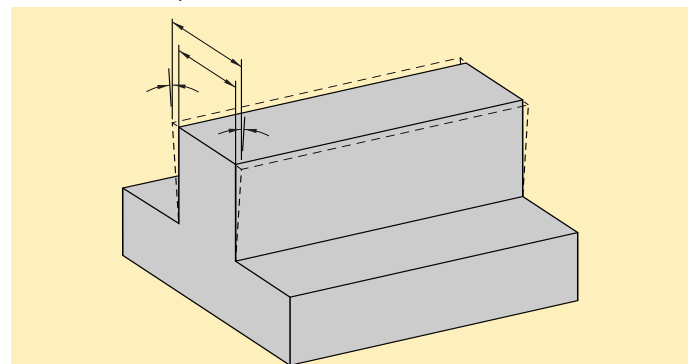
Flatness affects part tolerance more when milling both sides of a part.
